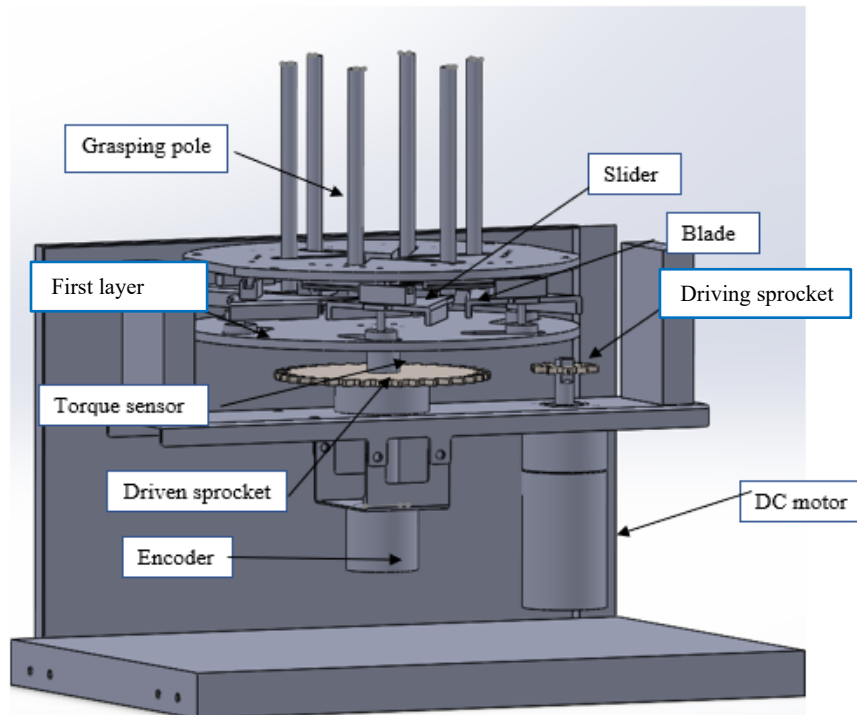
Inner part of the automatic finger extensor machine based on iris mechanism.
